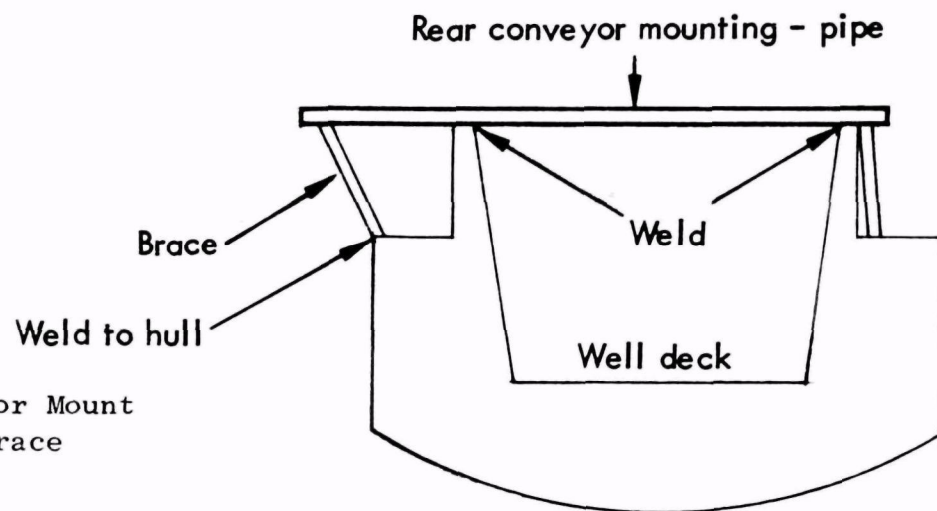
Rear Conveyor Mount and Supplementary Brace
